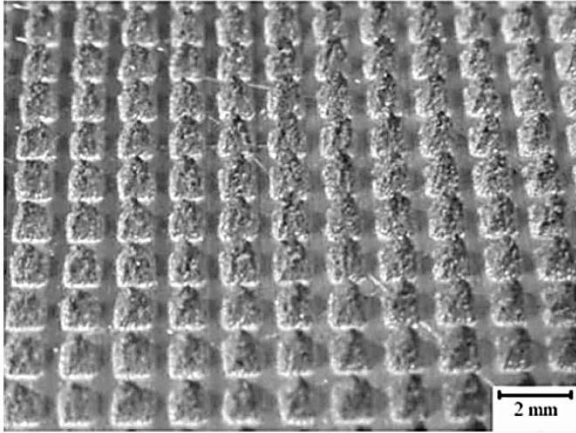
Fin array overview of aluminum sample Al-2 produced using cold spray and masking technique
